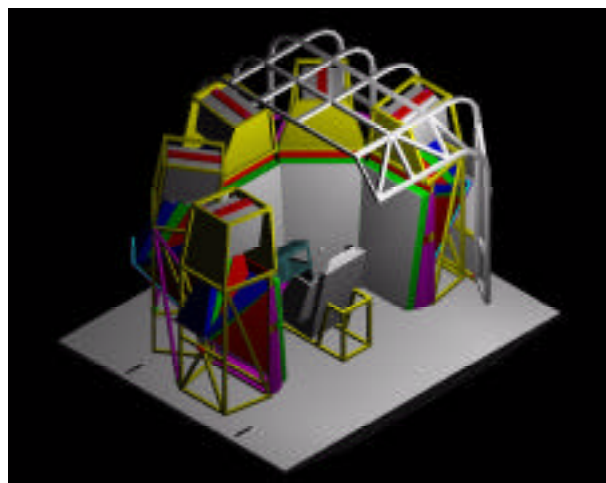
Digital rendering section view of the JSHIP ICAB showing the projection system, pilot seat and a partial view of the removable canopy.
